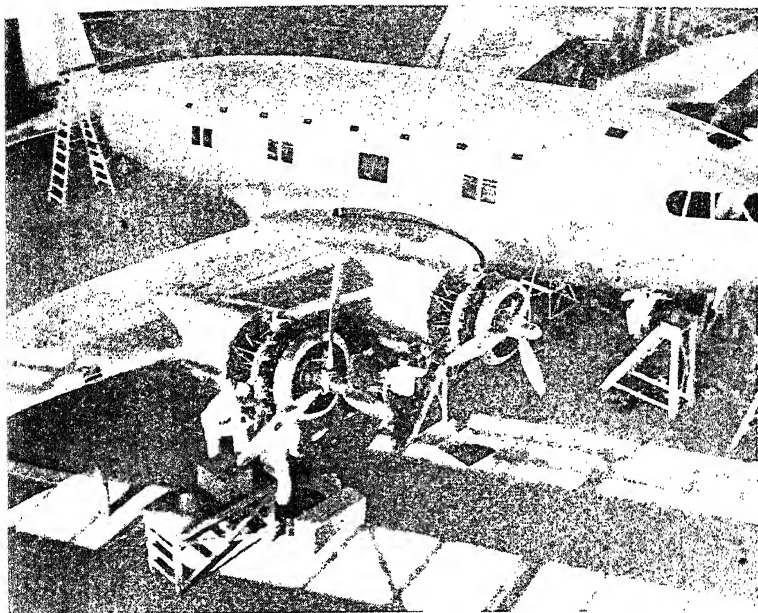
FINAL ASSEMBLY WORK ON A BOEING 307 STRATOLINER
